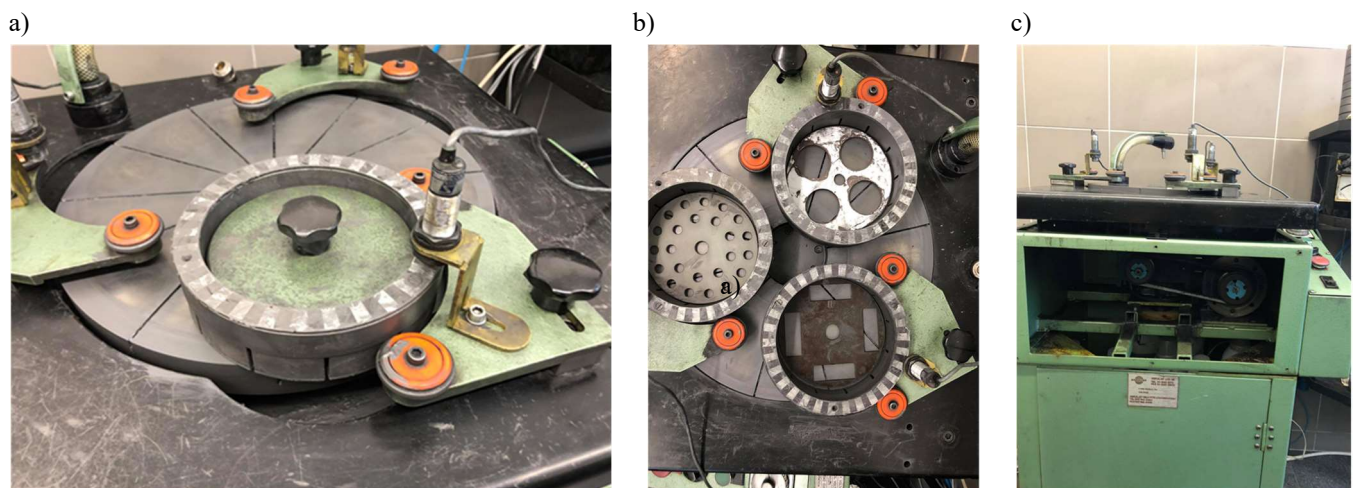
View of: a) guiding ring containing machined elements and their ballast loads b) separators placed in the three guiding rings, c) uncovered drive system of Abralap 380 lapping machine
